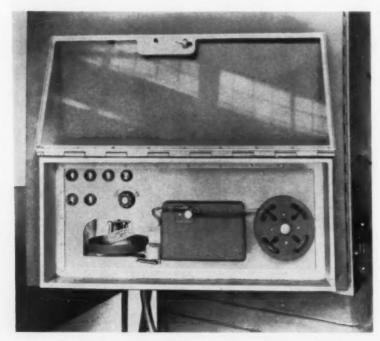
Tape transport cabinet of automatic electronic control system of machine illustrated in Fig. 1
